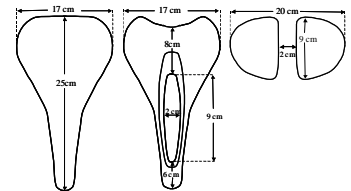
Top view of Standard Design; Partial Cutout Design; Complete Cutout Design
